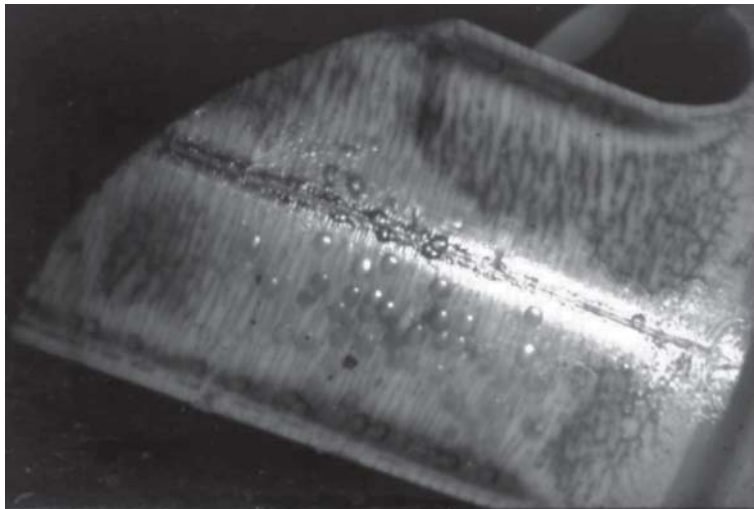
Embrittlement of an injection moulded acetal part, due to surface stress corrosion cracking of acetal in cider
